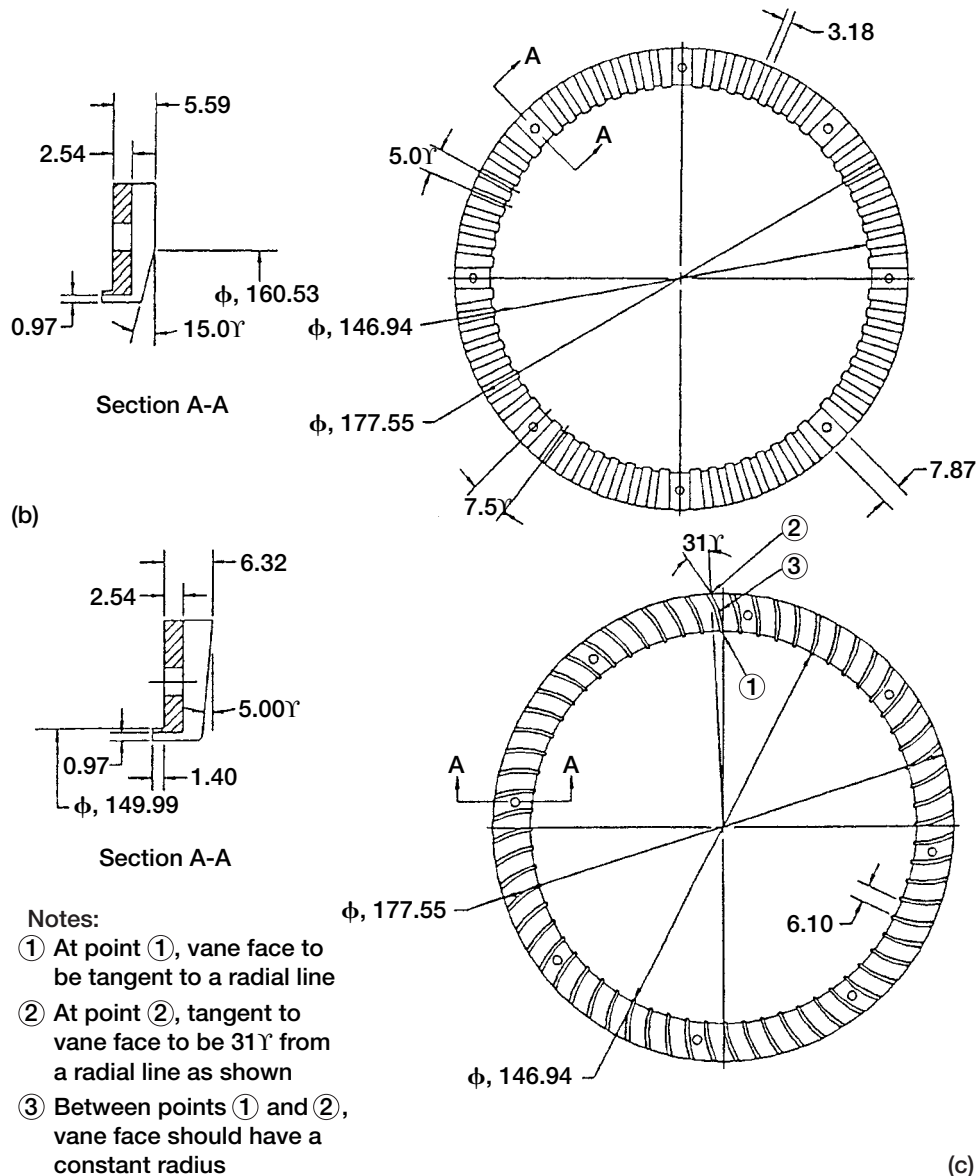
Concluded. (b) Radial swirl brake. (c) Improved swirl brake. Dimensions in millimeters. (Childs et al., 1991.)
